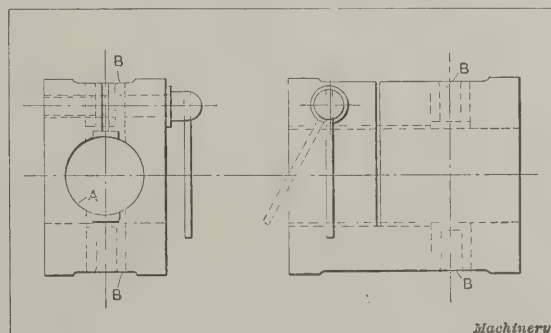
Block Jig illustrating Application of Angle-plate in Fig. 1
